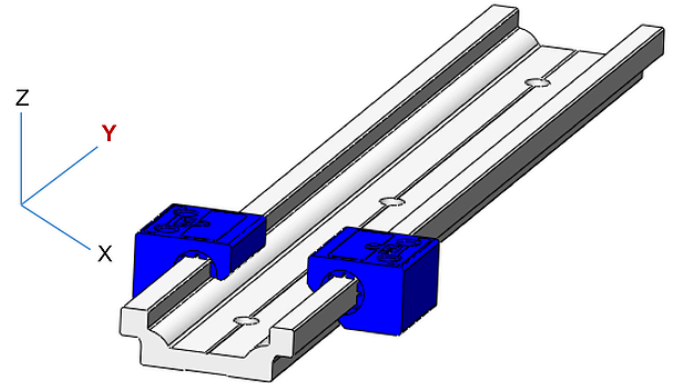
IGUS RAILS AND SLIDING BEARINGS
